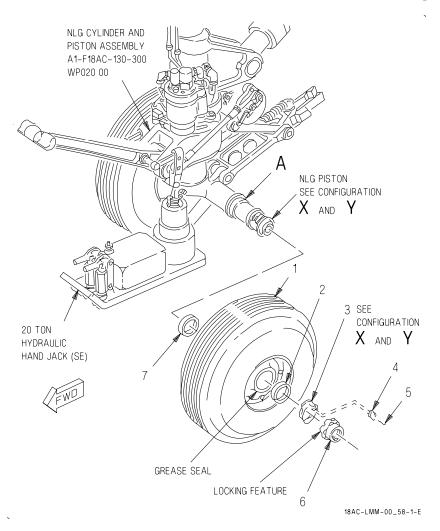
NLG Wheel and Tire Assembly Removal and Installation (Sheet 1)
